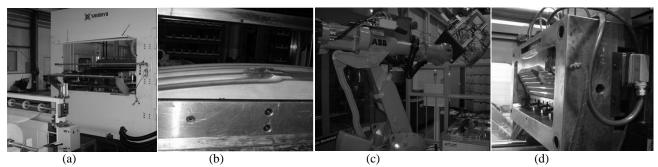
The manufacturing process: (a) film forming, (b) trimming, (c) film handling, and (d) injection molding.
